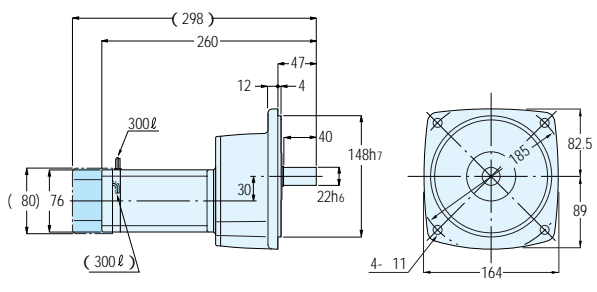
GILM-32-4 ~ 12/16 ~ 24-S25
